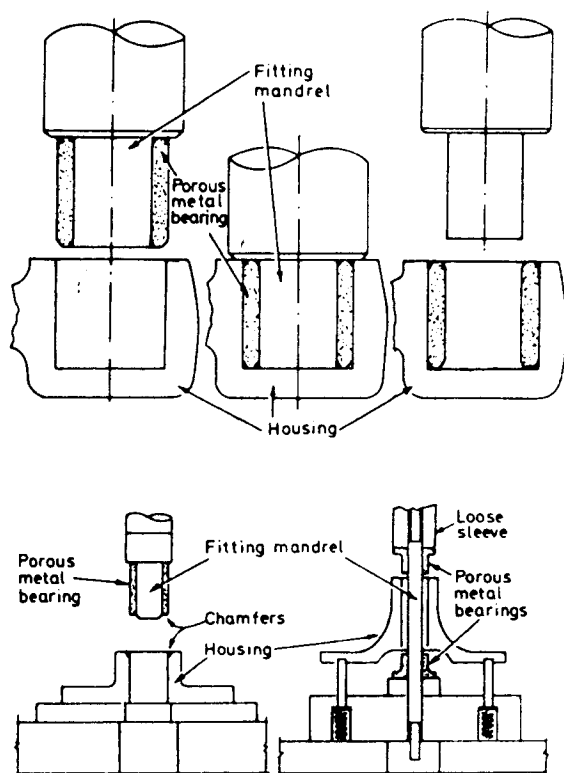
Force fitting of porous metal bearings using a fitting mandrel to control the fitted bore diameter and to achieve alignment of a pair of bearings
